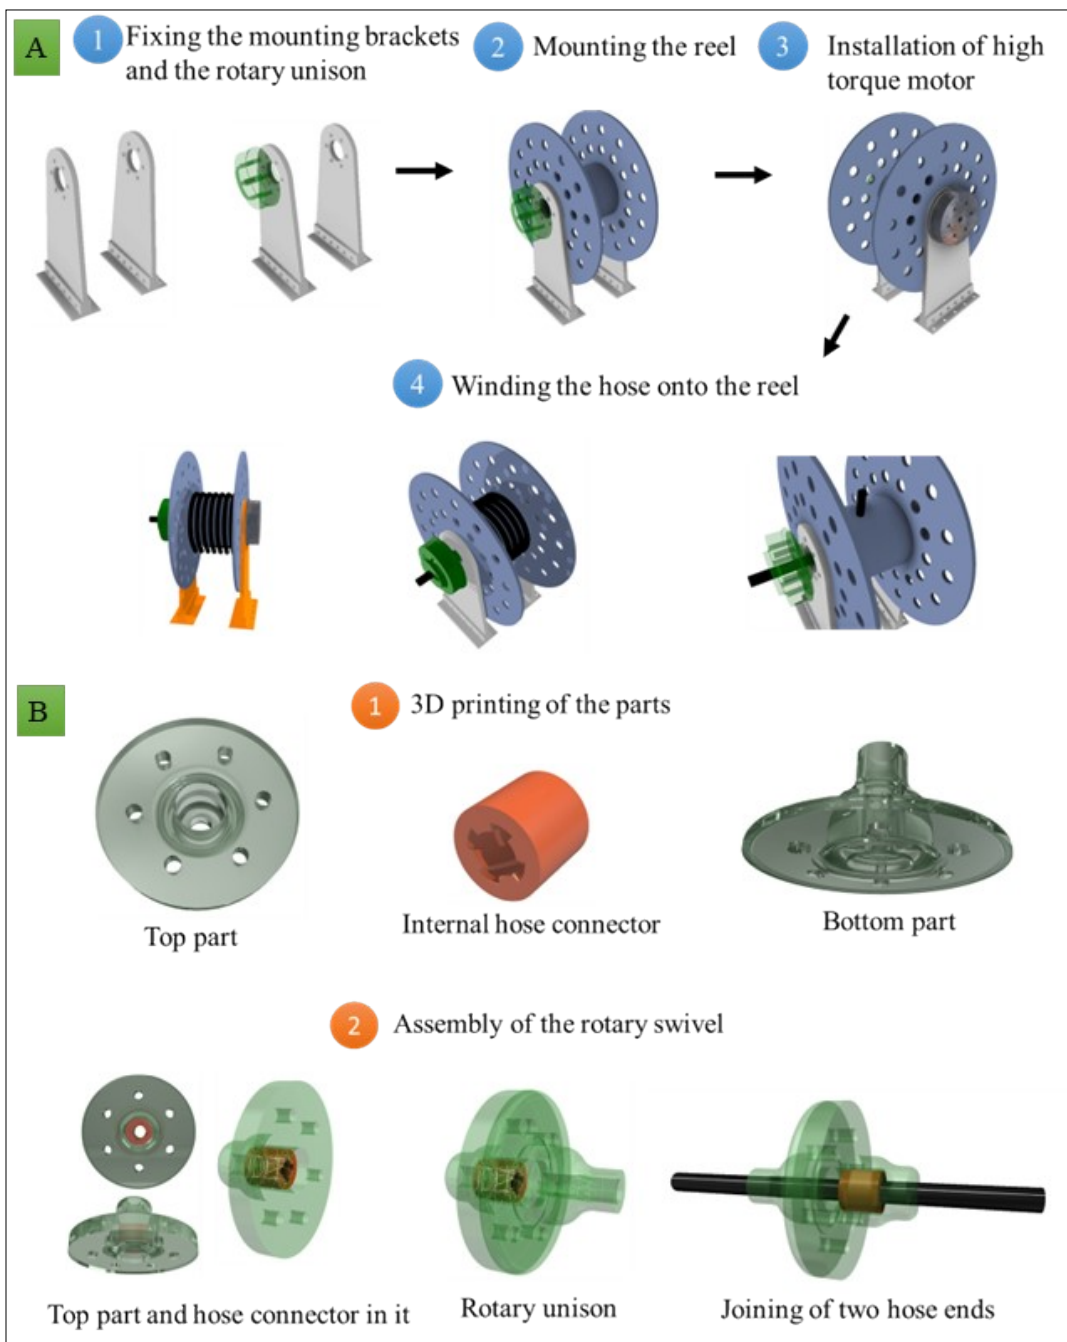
(A) Fabrication steps of hose reel system, (B) assembly of the 3D printed all plastic rotary unison.
